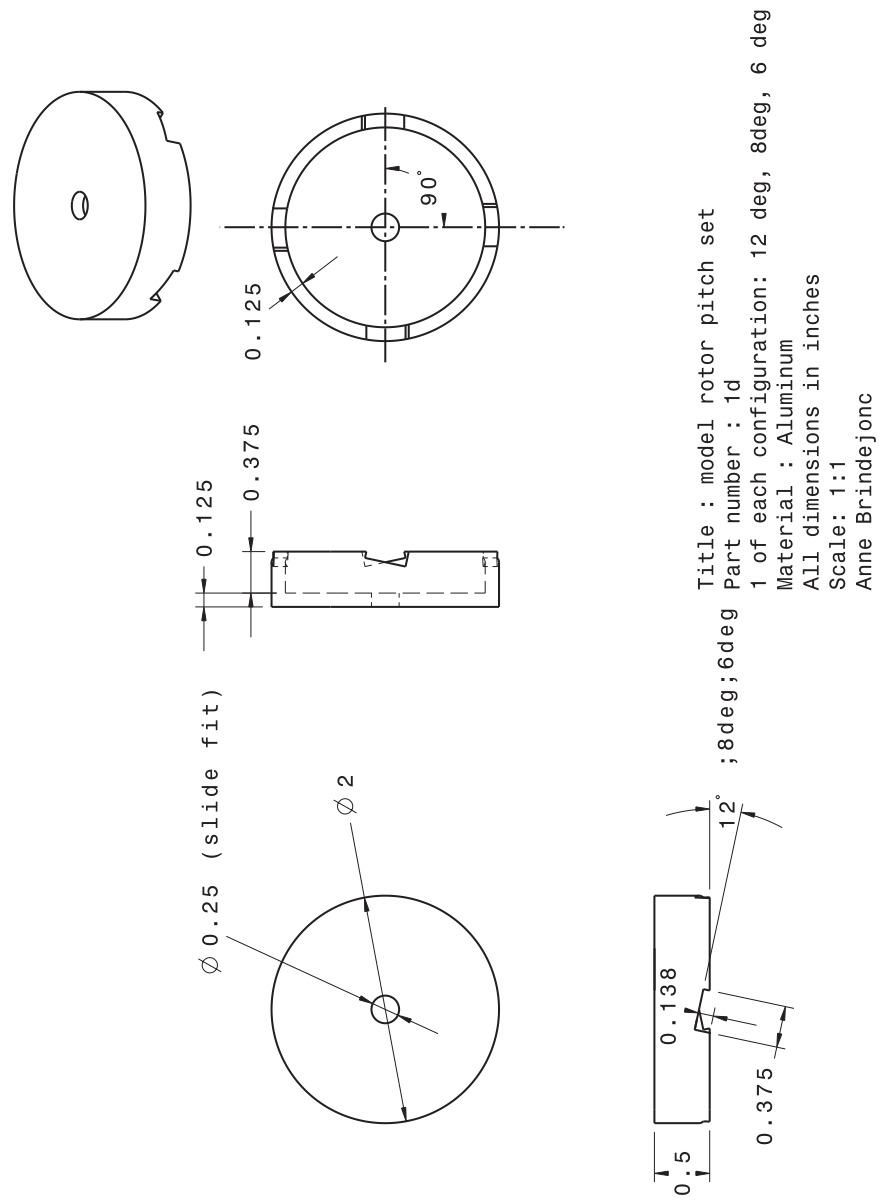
Pitch setting fixture mounted on the rotor shaft.
